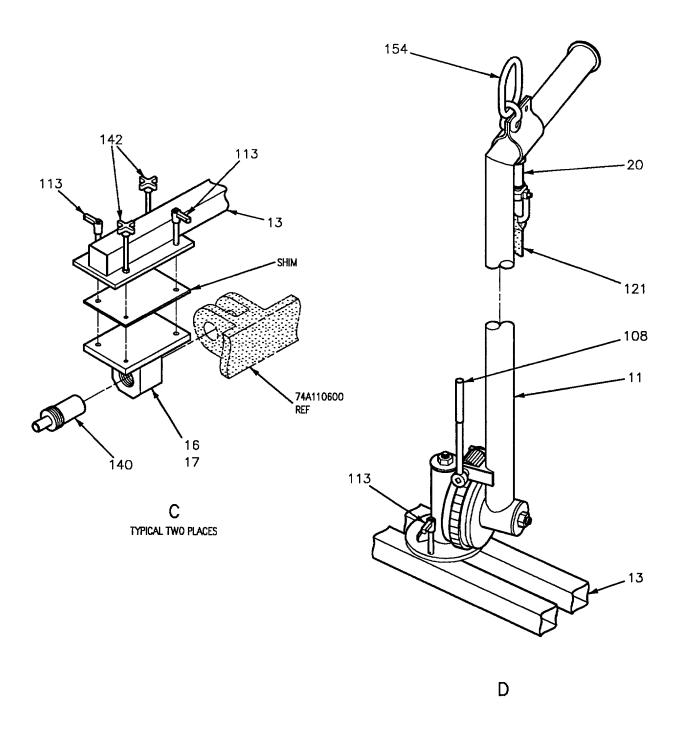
Attaching Hoisting Adapter to 74A110600 Upper Skin (Sheet 2)
